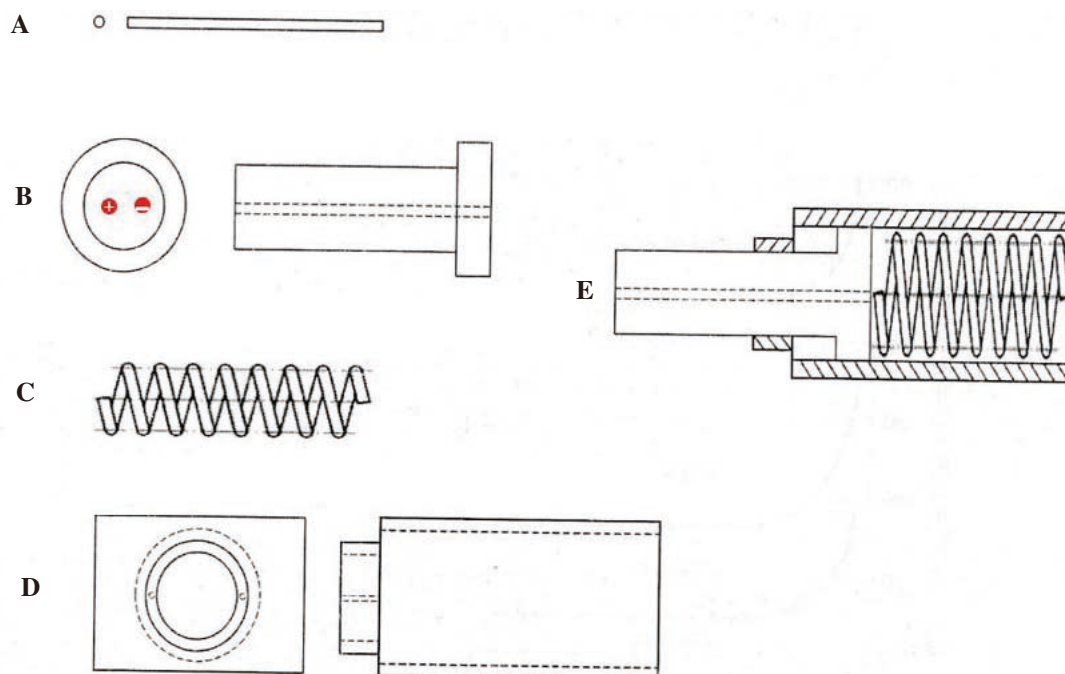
Mechanical system: Assembling of the main parts & detail of the conducting electrodes. A: Copper (front and side view); B: Contact sole of the foot. Plunger with inserts copper \times 2 (front and side view); C: Calibrated spring 10 kg (side view); D: Device casing (front and side view); E: Part assembling of figures A, B, C, D.
